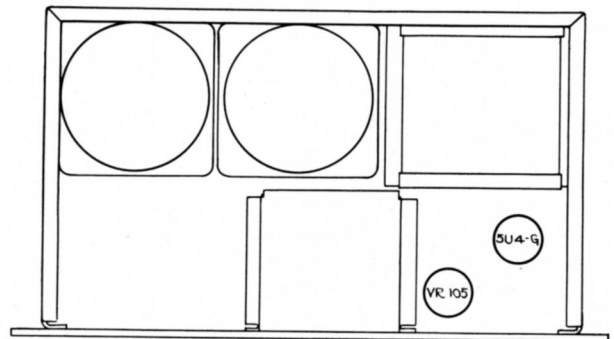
Rectifier Power Unit, Tube Locations (MX-244730)
